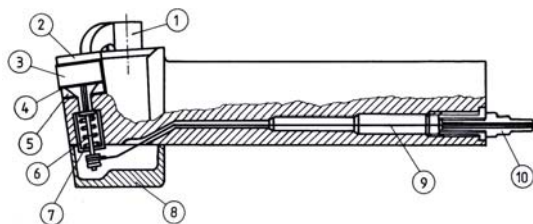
Cutting tool holder cross-section, 1 - thumb, 2 - chip breaker made from Al_2O_3 , 3 - cutting tool insert made from mixed ceramics MC 2, 4 - mica, 5 - washer, 6 - mechanism, 7 - isolation bushing, 8 - protective cap, 9 - signal conductor, 10 - connector.
